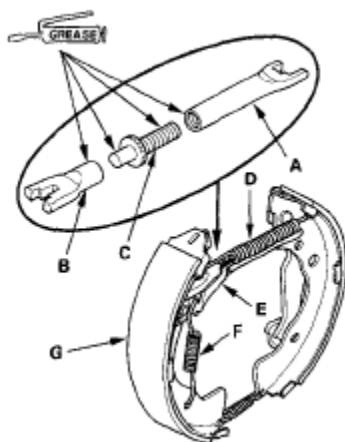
Installing Connecting Rods A And B On Adjuster Bolt
